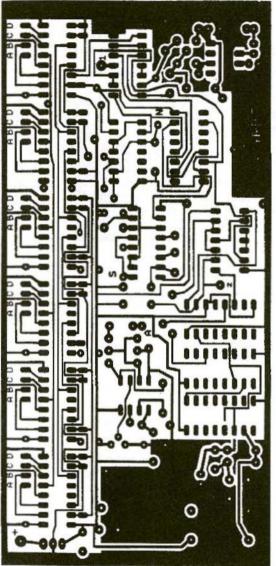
Layout of DG4RBF 001 Counter Printed Circuit Board Zähler für = Counter for
